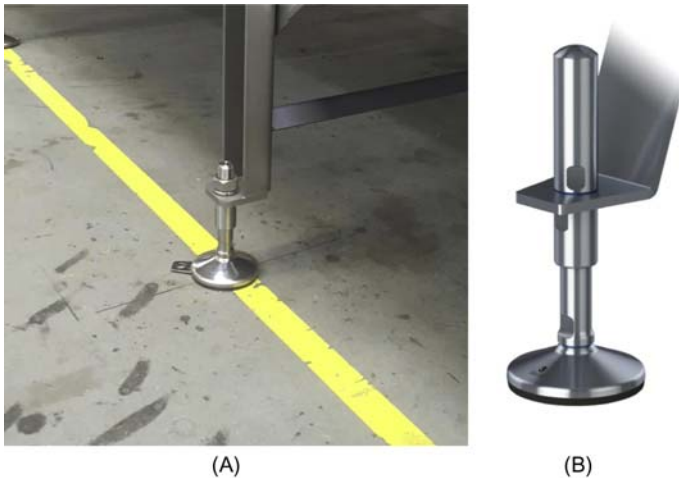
(A) Fixation of the leveling feet onto open profile legs may not leave thread parts exposed. (B) A top sleeve with O-ring seal and round top must be used to cover the exposed thread parts. *Courtesy of NGI A/S*.
